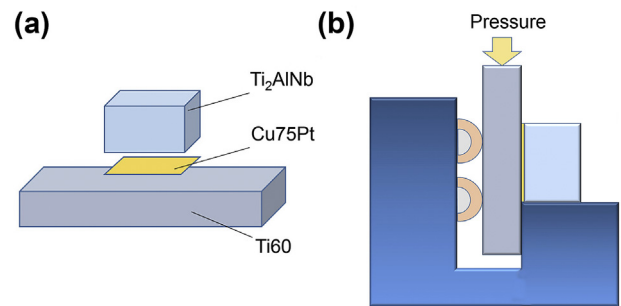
Schematic diagrams of assembling brazing parts (a) and shear test experiment (b).
